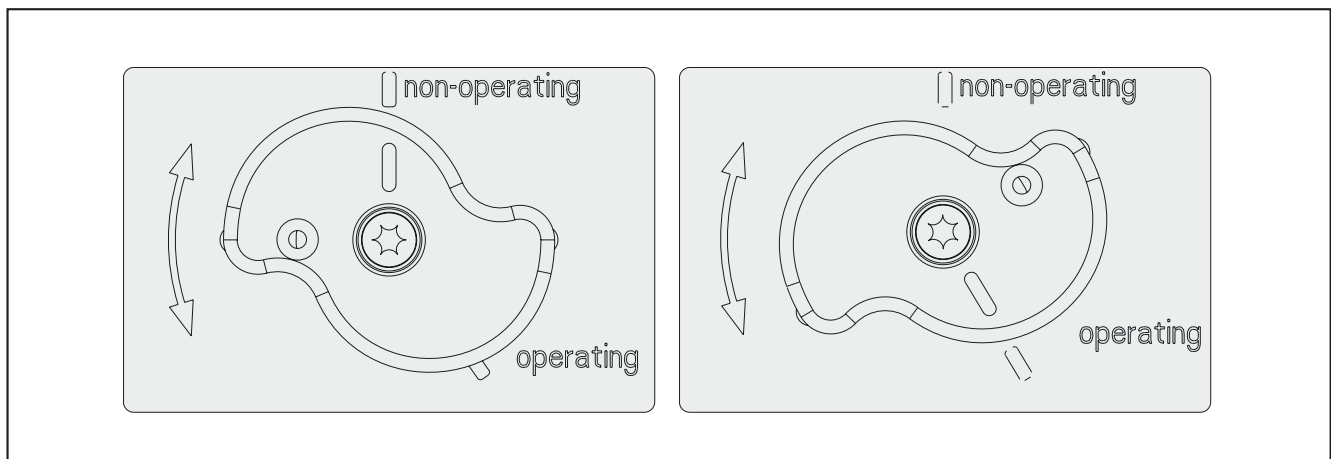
Transport lock for hard disk drive: left locked; right unlocked
